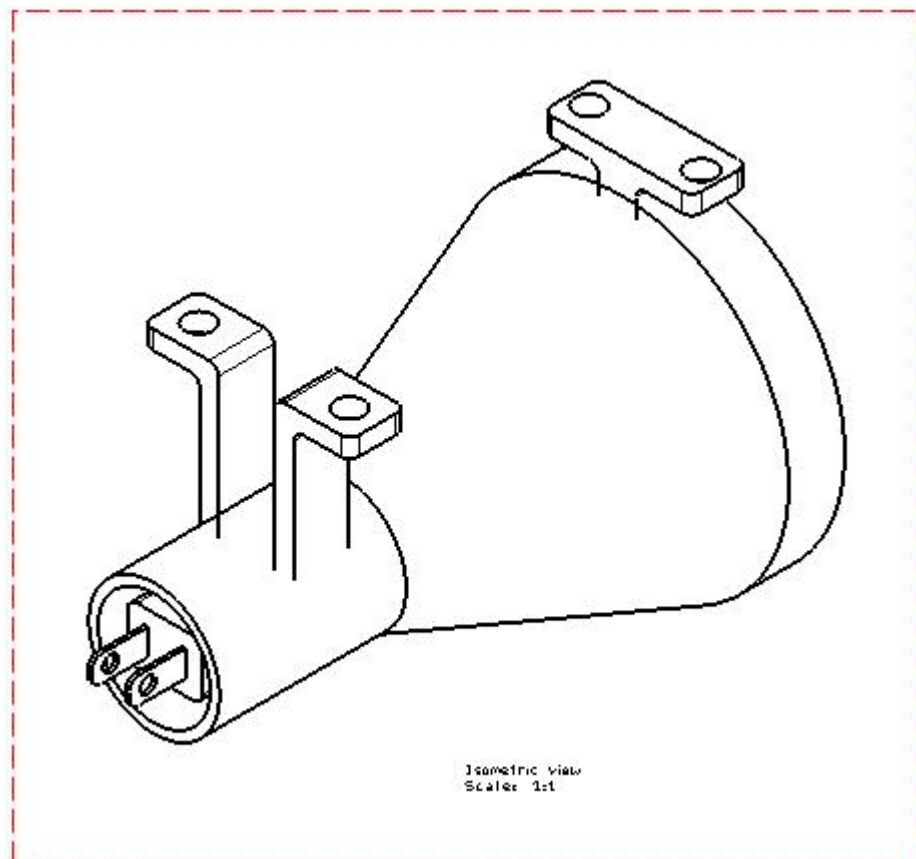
Assembly Design for Micro Wind Turbine with Casing
